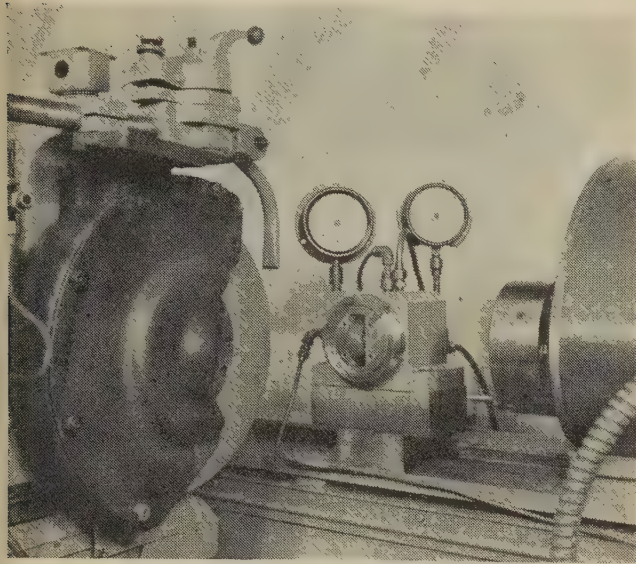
EXPERIMENTAL CRUSH DRESSER MOUNTED ON TABLE OF CENTER-TYPE GRINDER
